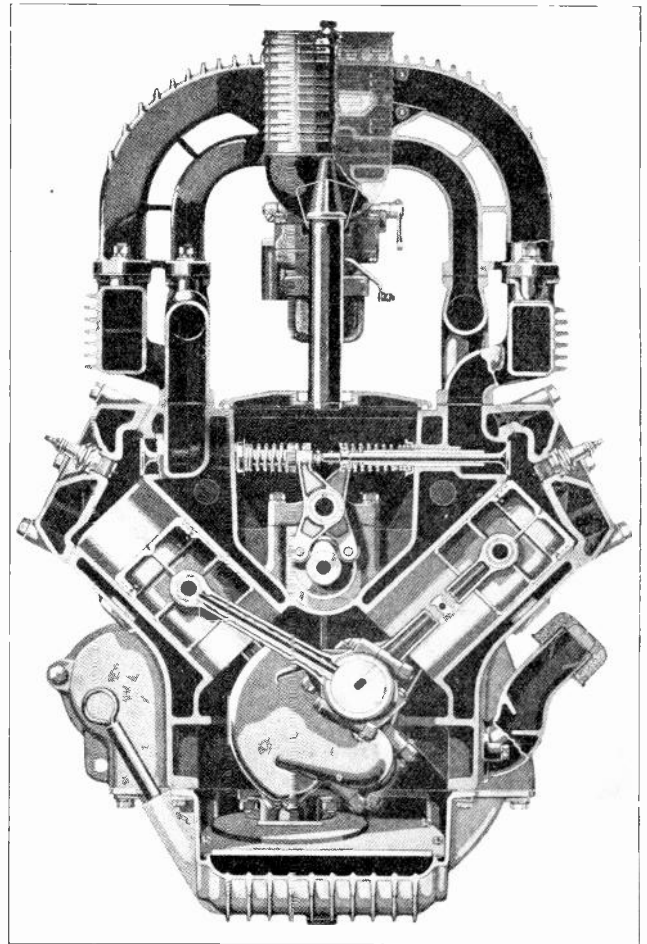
An excellent end sectional view of a modern V-type, eight-cylinder engine. Note carefully the arrangement of the pistons, valves, cam shaft, rocker arms, spark plugs, carburetor, and intake and exhaust manifolds. Courtesy Oldsmobile Viking Mfg. Co.
